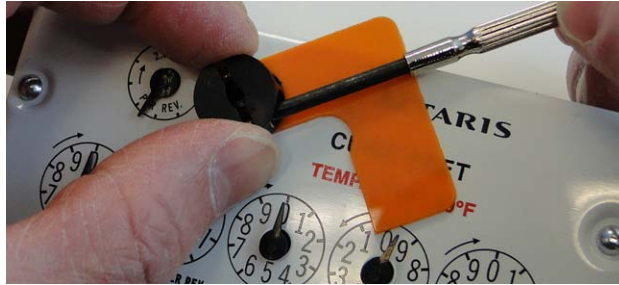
9. Insert Shim and Alternately Tighten Screws To 1.2 inch-lbs. (± 0.10 inch-lbs.)
